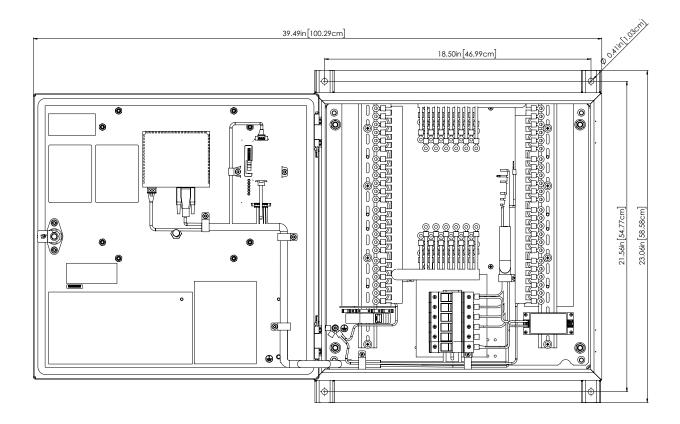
NEMA 4 Mounting Hole Locations and Dimensions
